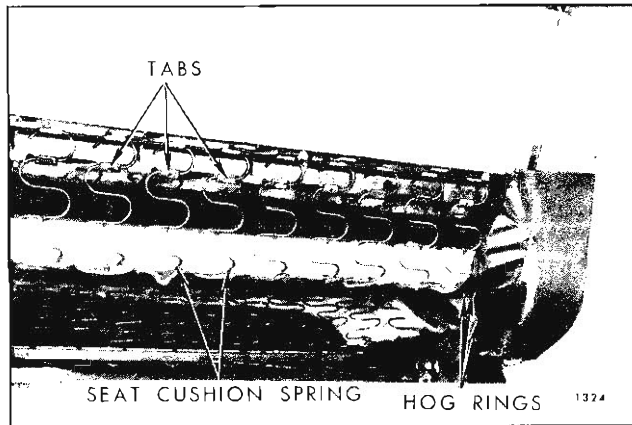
H2—Front Seat Cushion-To-Seat Back Spring Attachment
